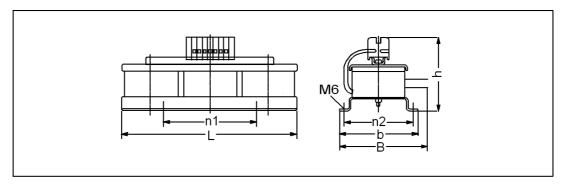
Dimension drawing: line reactor for Active Line Modules (up to 55 kW)
